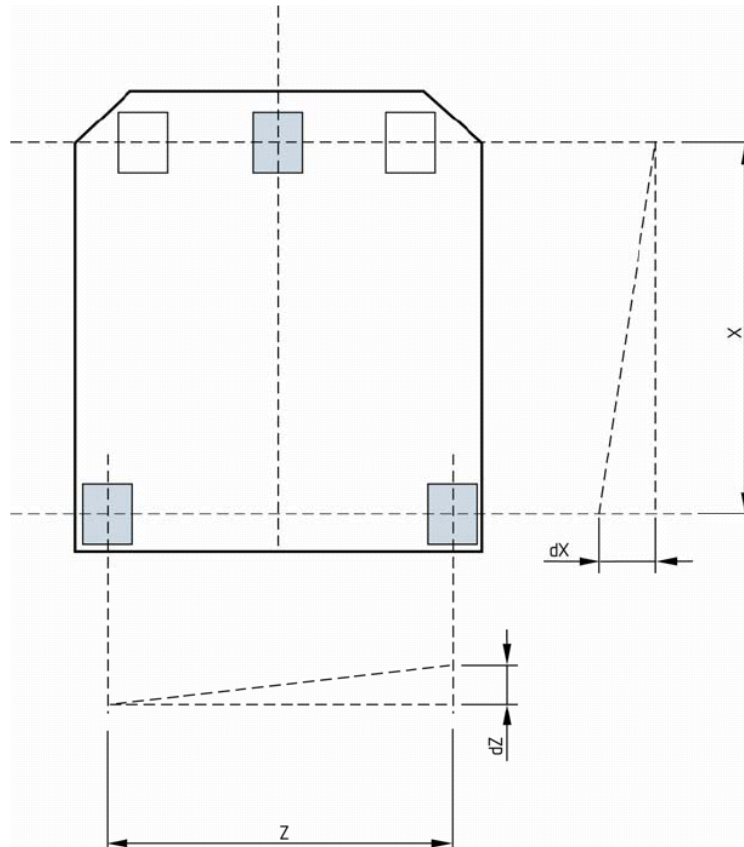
Z Dimension between the centres of truck front wheels in mm, X Wheelbase or 2000 mm
